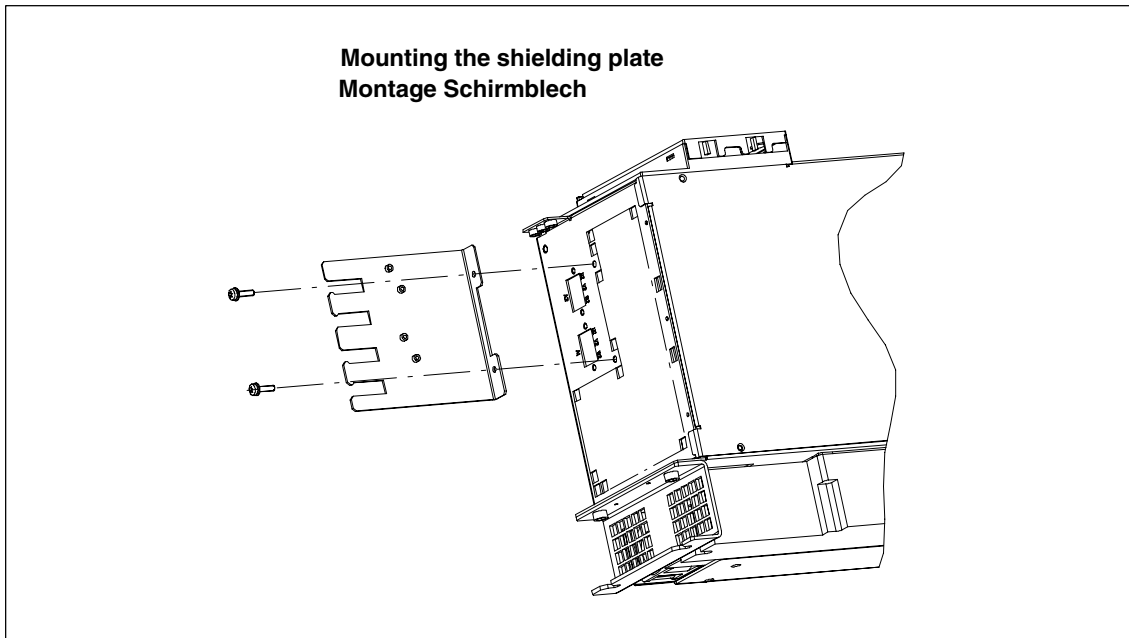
2-axis CCU box: Mounting the shielding plate
